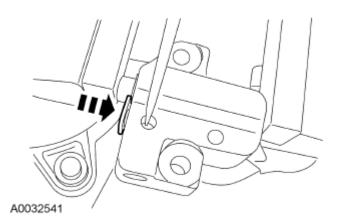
Pushing Ratchet Arm Back Into Tensioner Housing
